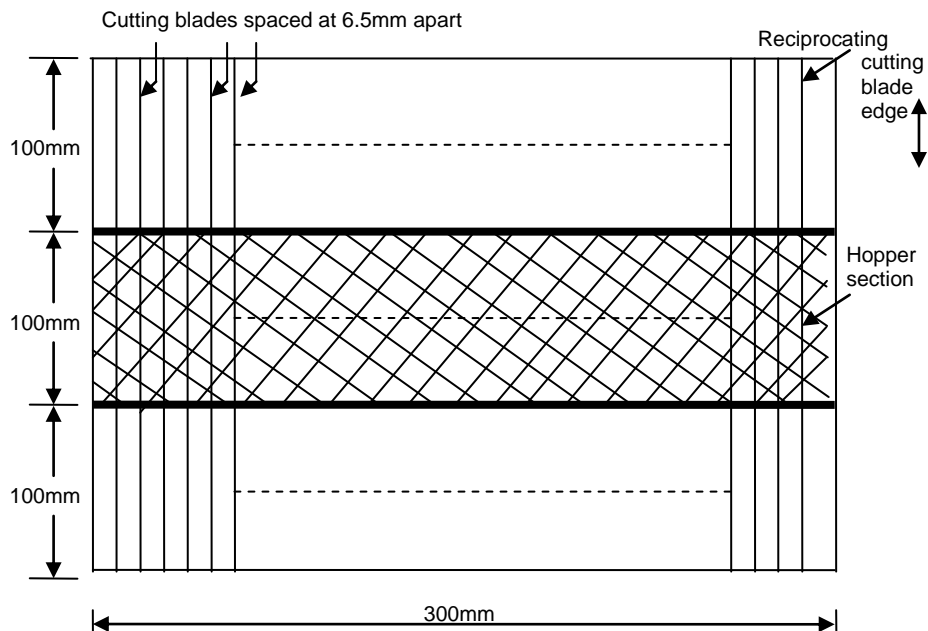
Cutting blades arrangement and cross – section of meat hopper
